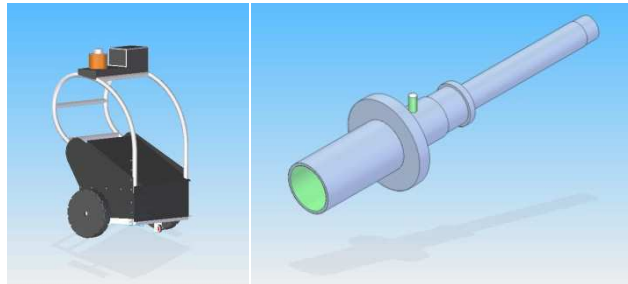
(a) CAD Model of the Mobile Robot (b) CAD Model of the Custom built shaft
